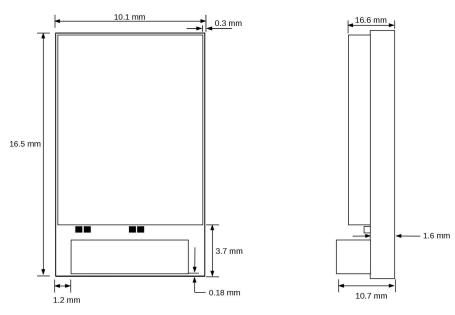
The mechanical dimensions of the GRBTM-ANT module including the shield..
